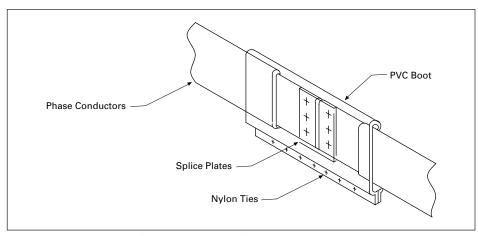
Boot Assembly (for Insulated Bus Only)
